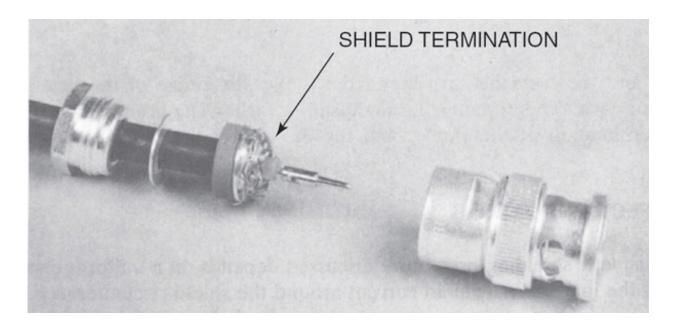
Disassembled BNC connector showing a 360° contact to the shield
